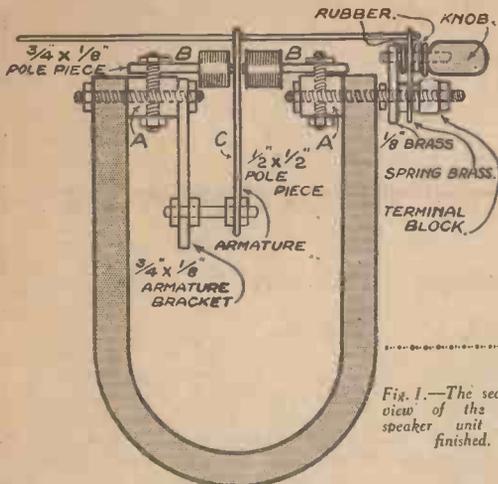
The sectional view of the loud-speaker unit when finished.
